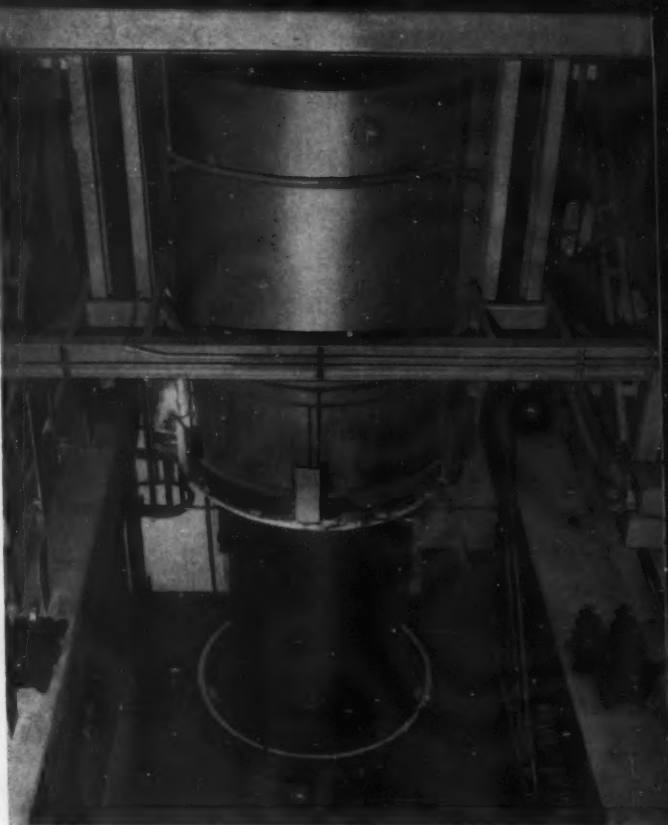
Here, the huge heating bell is being lowered onto a work base and over the retort bell which had been previously placed over the thrust chamber.
